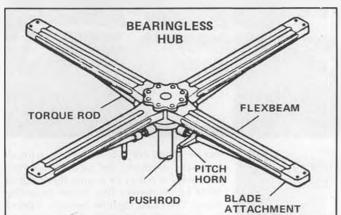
(left). A bearingless main rotor does away with all three mechanical hinges; blades attach to flexbeams that are designed to bend or flex in the necessary directions.
